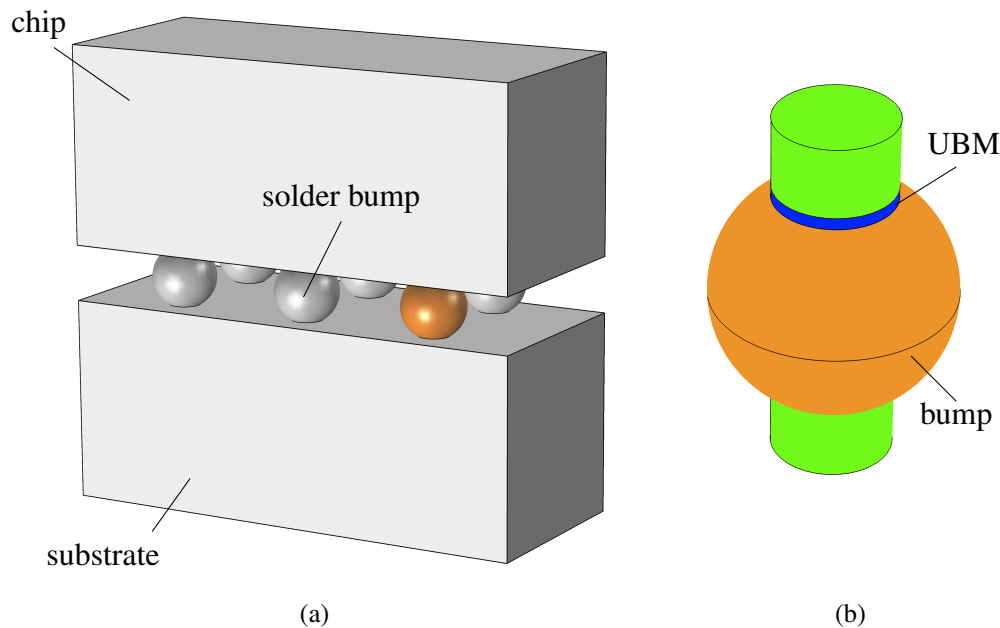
(a) Example of 3D integration with solder bumps. (b) Zoomed-in detailed profile view of a solder bump.
